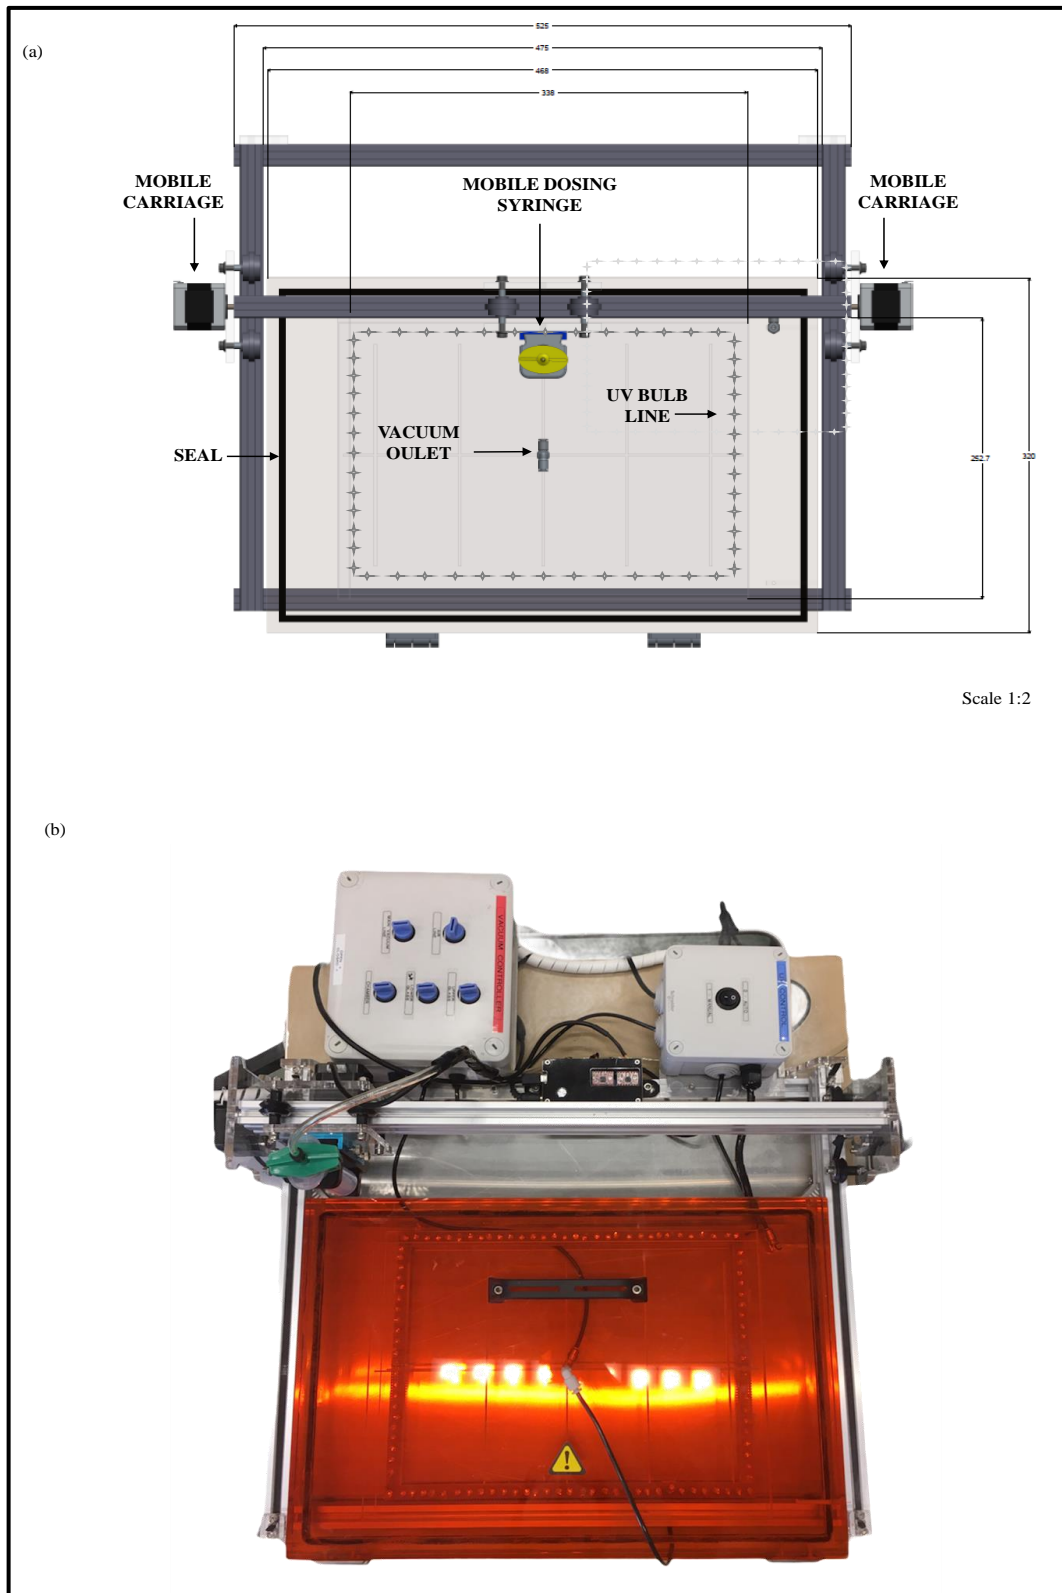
a) The upper view of the rendering and b) the real view of the Glue Dispensing-Assembling system. The dimensions of the system in the design table are expressed in millimeters on a scale of 1:2.
